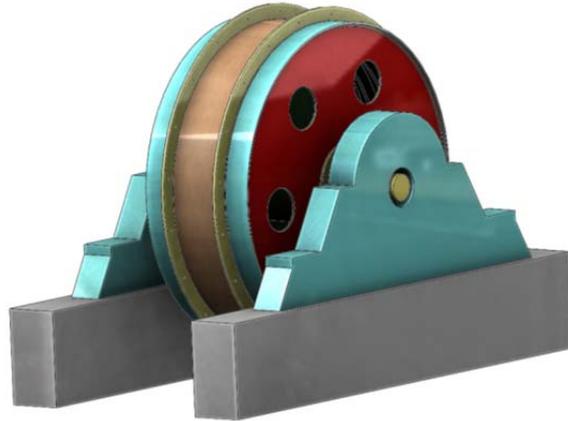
The virtual assembly of the drive wheel drums of the mine hoist
